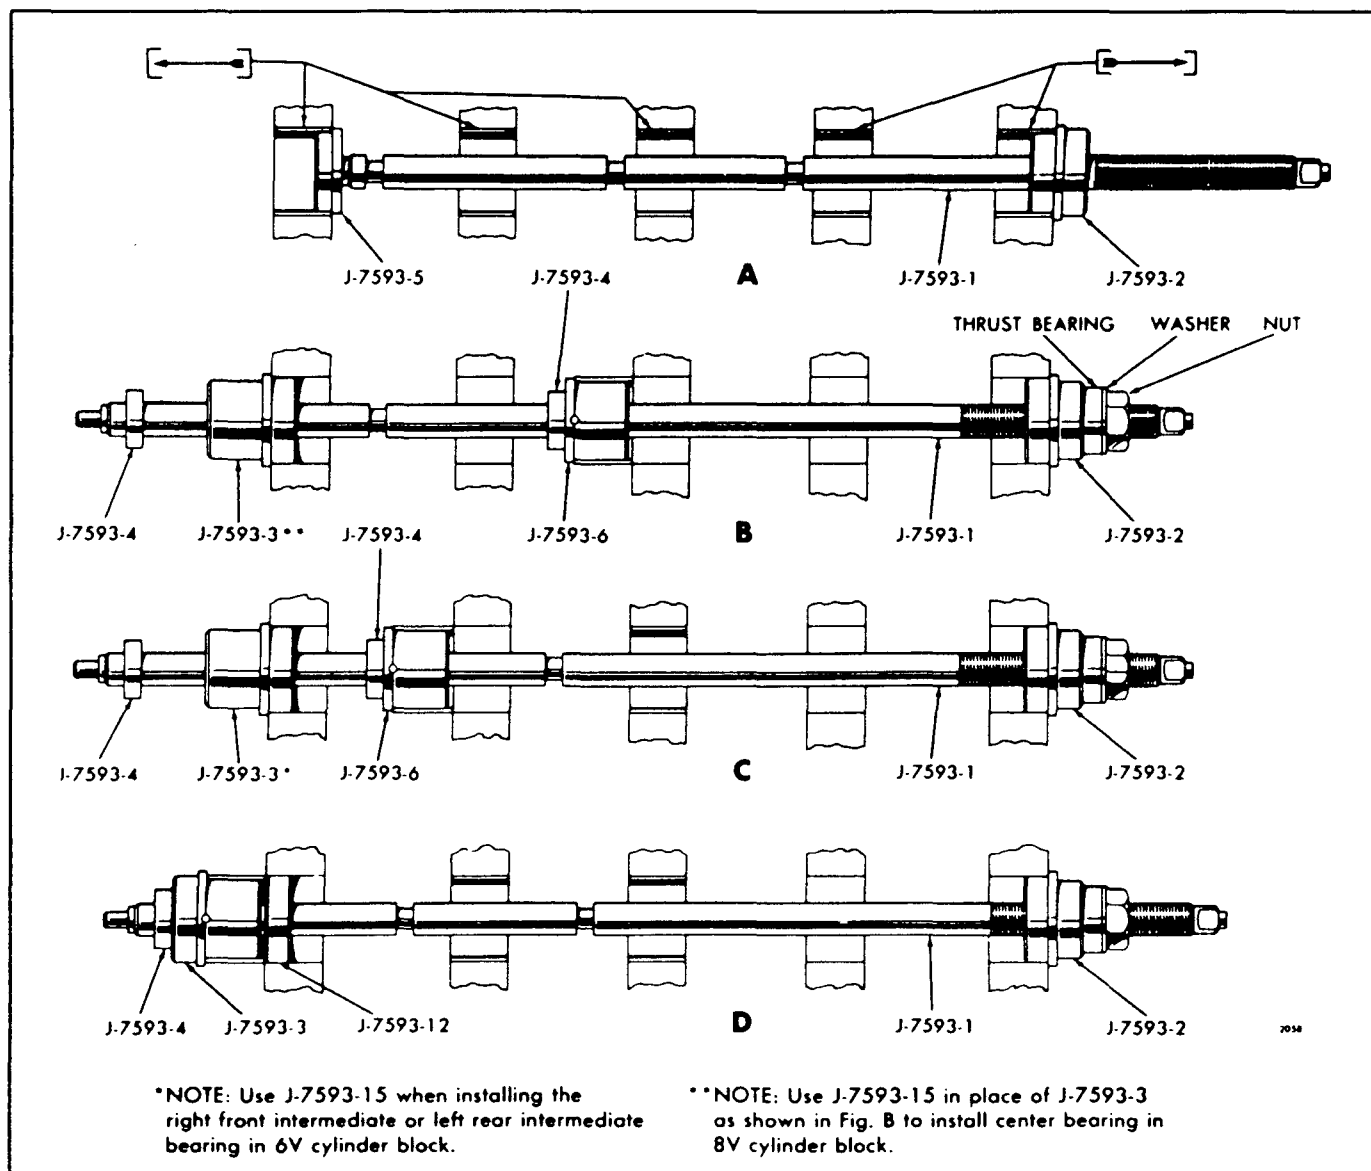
Removing and Replacing Camshaft or Balance Shaft Bearings
